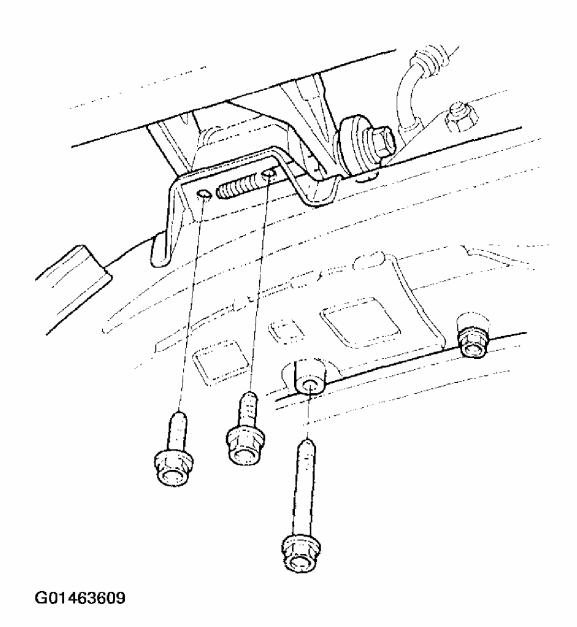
Removing The Bolts Securing The Rear Mount Courtesy of AMERICAN HONDA MOTOR CO., INC.
